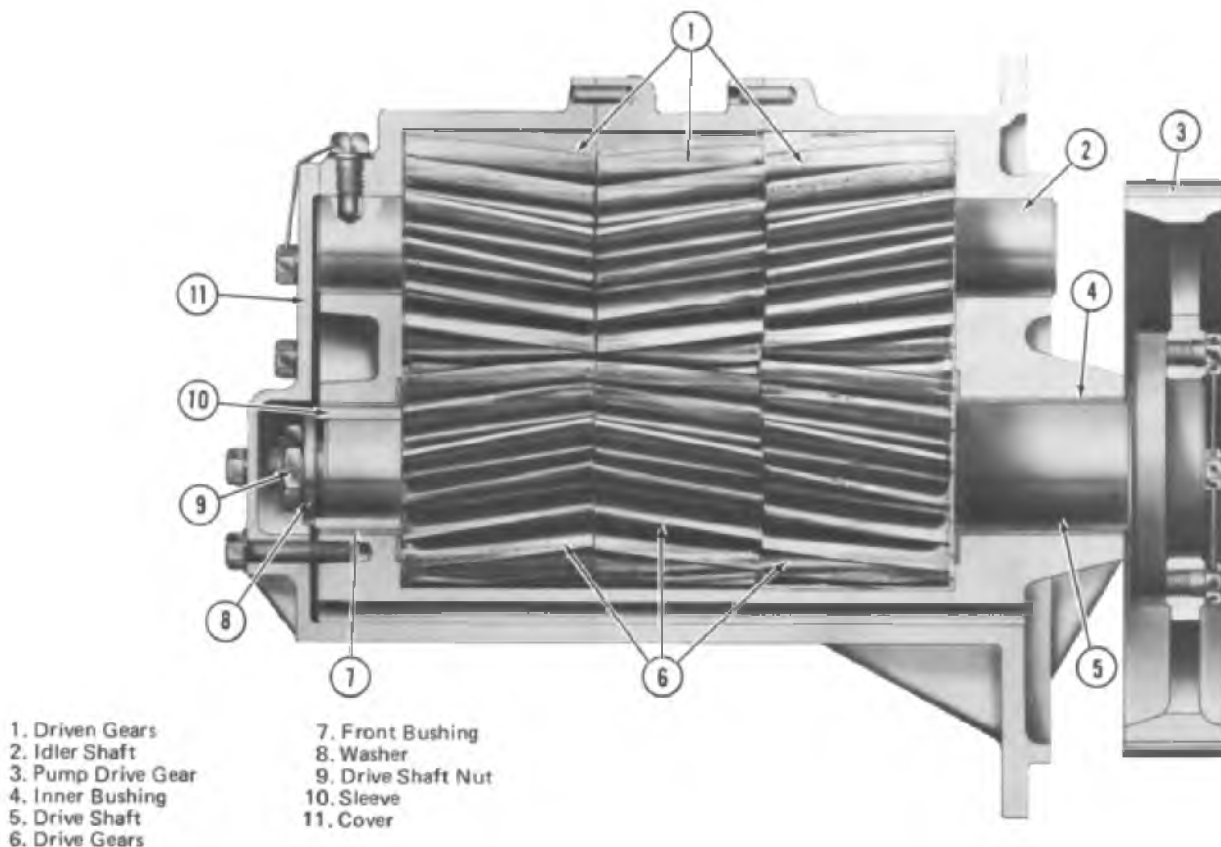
Scavenging Oil Pump, Cross-Section (16 & 20-Cyl.)
